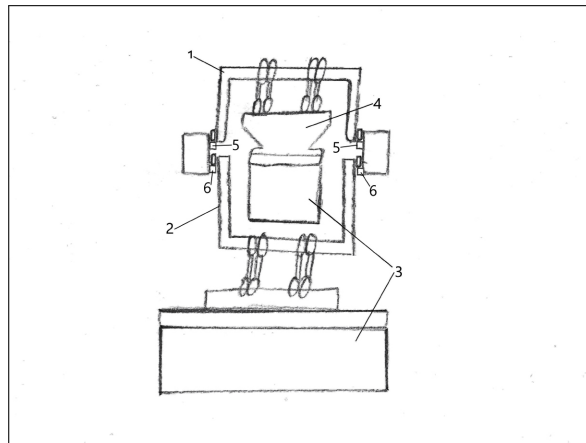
Concept 3. Simplified cross section drawing. 1: upper trolley. 2: lower trolley. 3: container. 4: rotating headblock. 5: rails for upper trolley. 6: rails for lower trolley.
